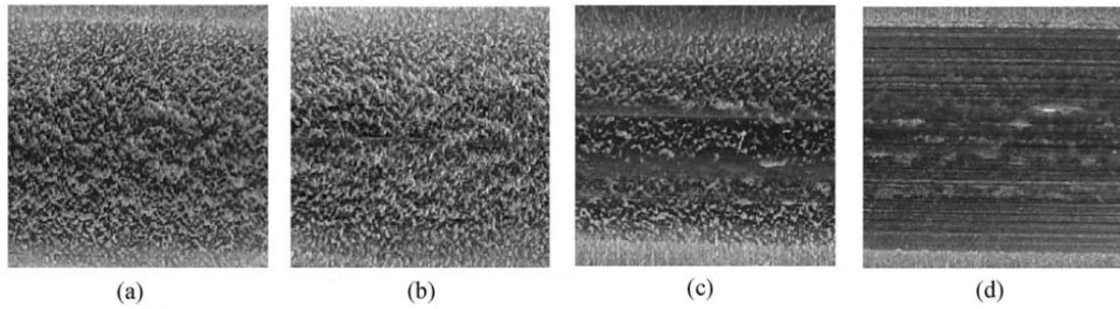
Optical images of surfaces formed: (a) Spherical end tool with lubrication, (b) Spherical end tool without lubrication, (c) Hemispherical end tool with lubrication, (d) Hemispherical end tool with lubrication.[7]
